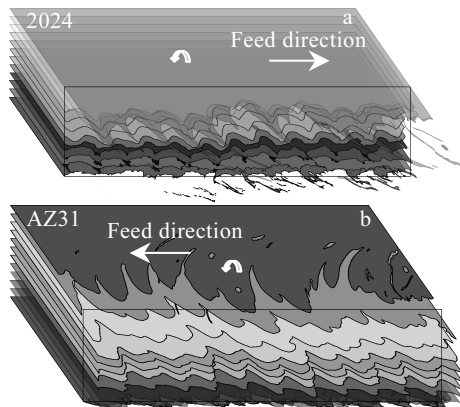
3D reconstruction of joint surface sections: (a) aluminum side and (b) magnesium side
